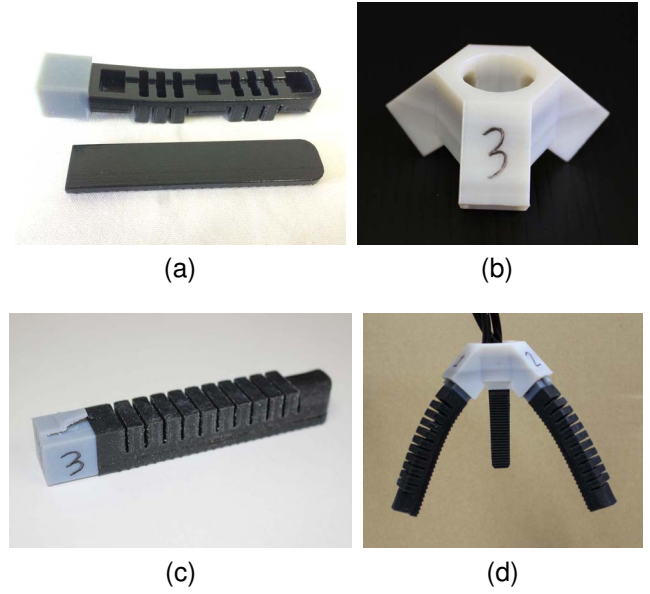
Fabrication and assembly of the gripper. Sub-figure (a) shows the two printed parts of the finger, (b) the printed base, (c) the complete finger by gluing the two parts together, and (d) the assembled gripper.
